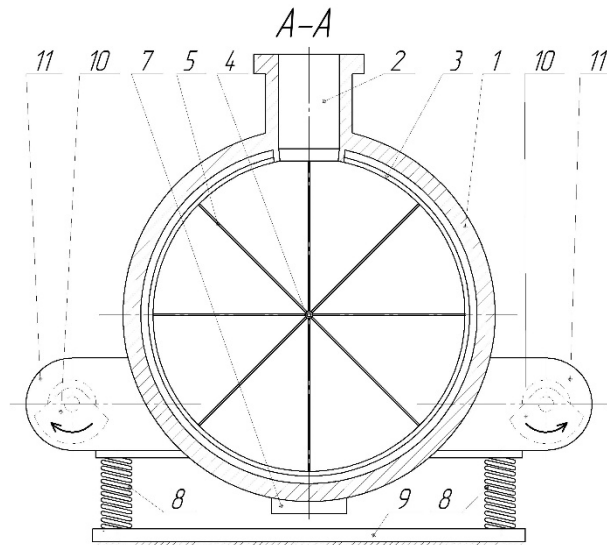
Scheme of a vibrating machine for dry cleaning of root vegetables, section A-A in Fig. 1.
